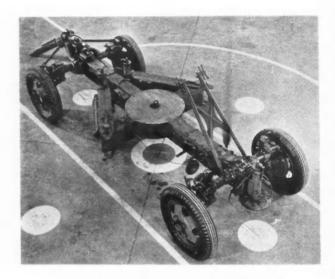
Gun carriage ready for mounting the top carriage and mechanism
